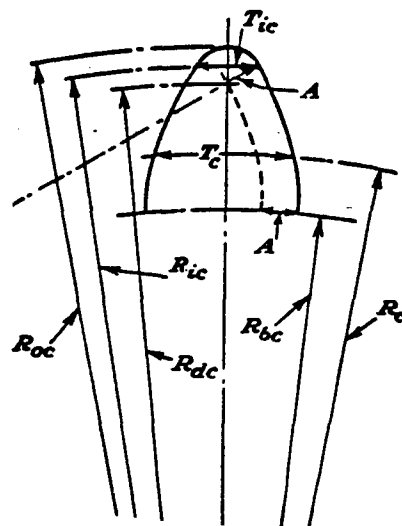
Geometry of Full-Rounded Shaper Cutter Tooth (symbols explained in text) (4)
